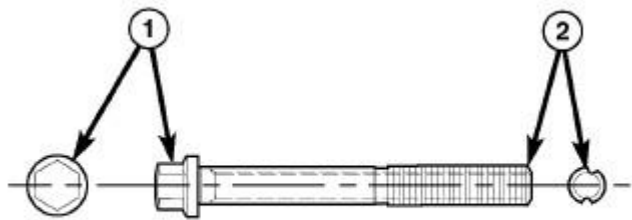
WHEEL ALIGNMENT ADJUSTMENT BOLT
